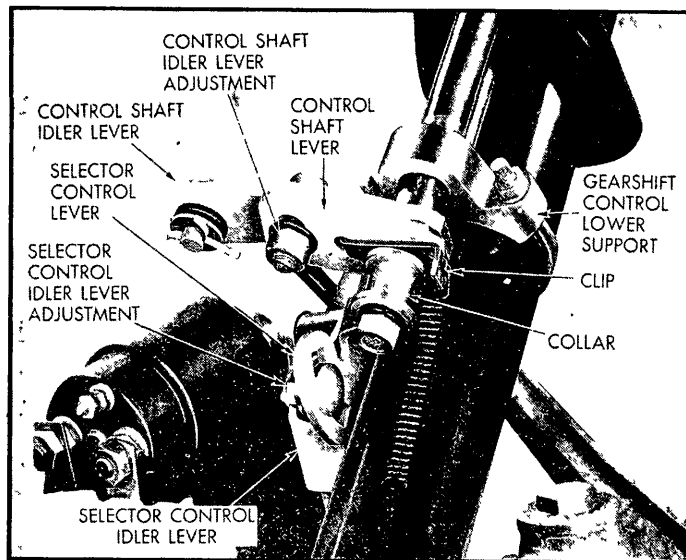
A Details of lower gearshift controls. 1949-52 with synchromesh transmission
